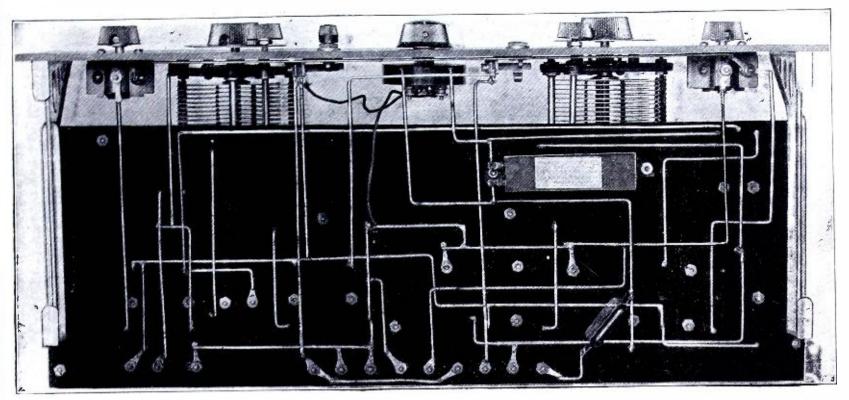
Photo D. Bottom view of sub-panel. Note the neat arrangement of wiring
